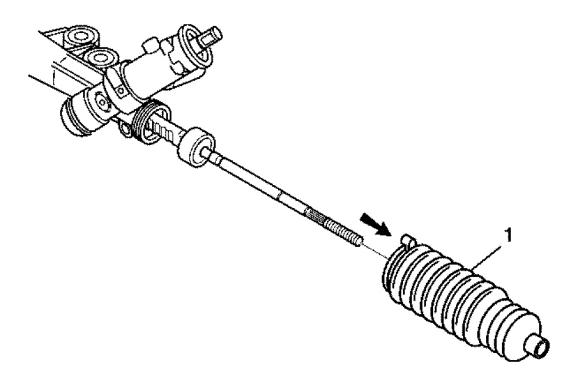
Removing Rack & Pinion Boot Courtesy of GENERAL MOTORS CORP.
